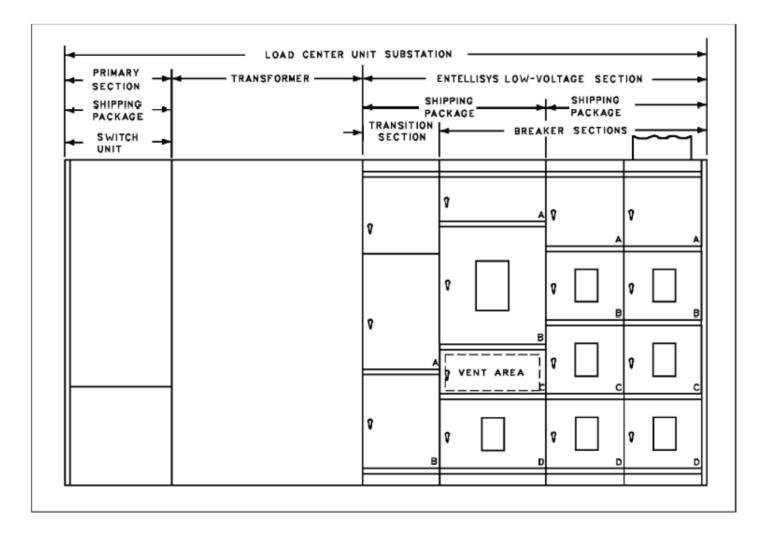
Outline of a typical Entellisys Load Center Unit Substation
